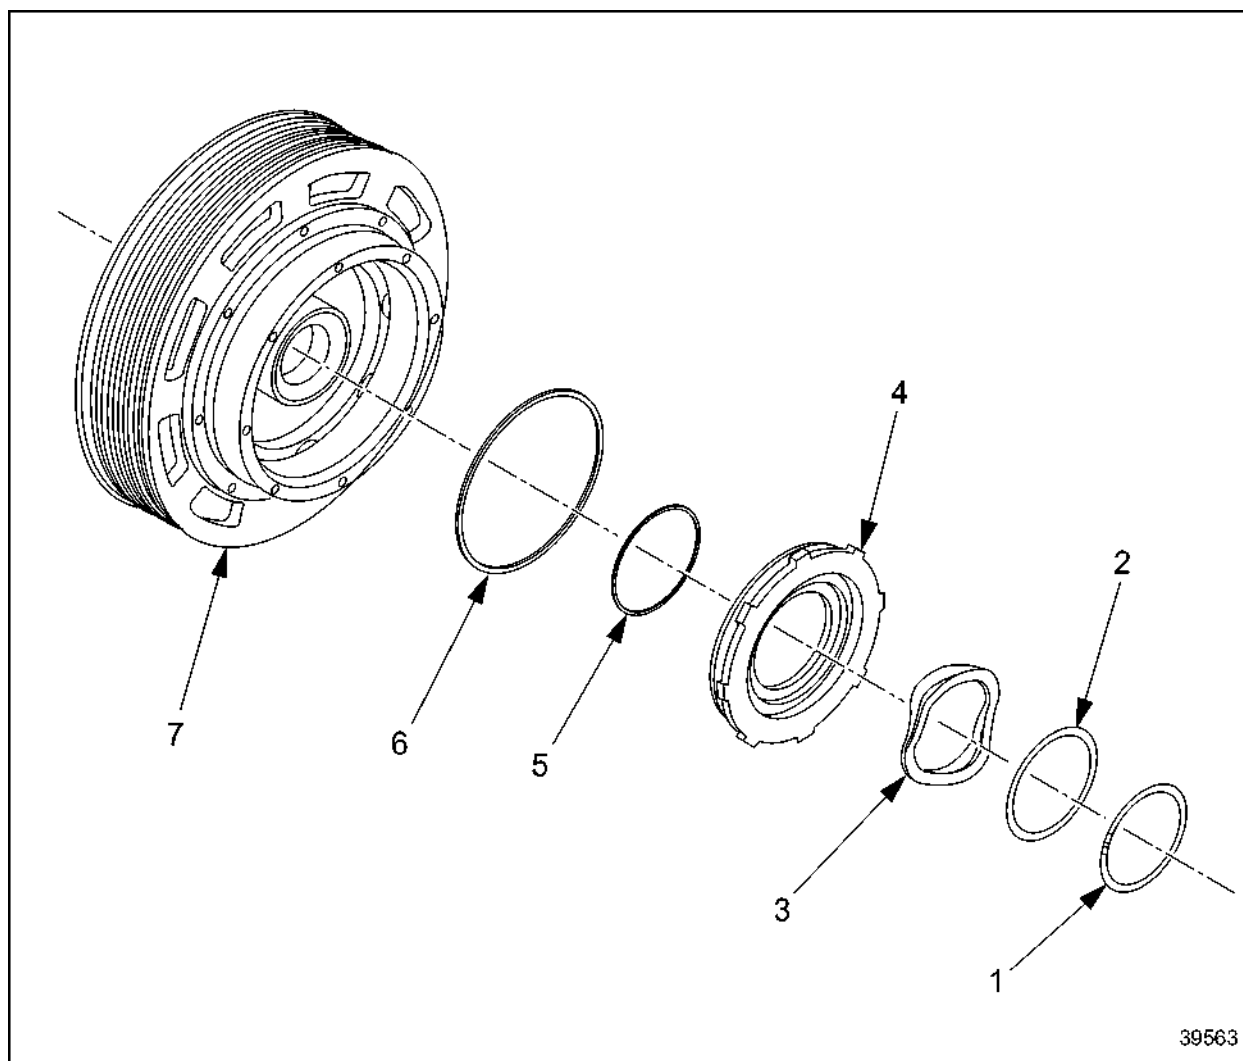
Inspection of Fan Clutch (View 1 of 5)
